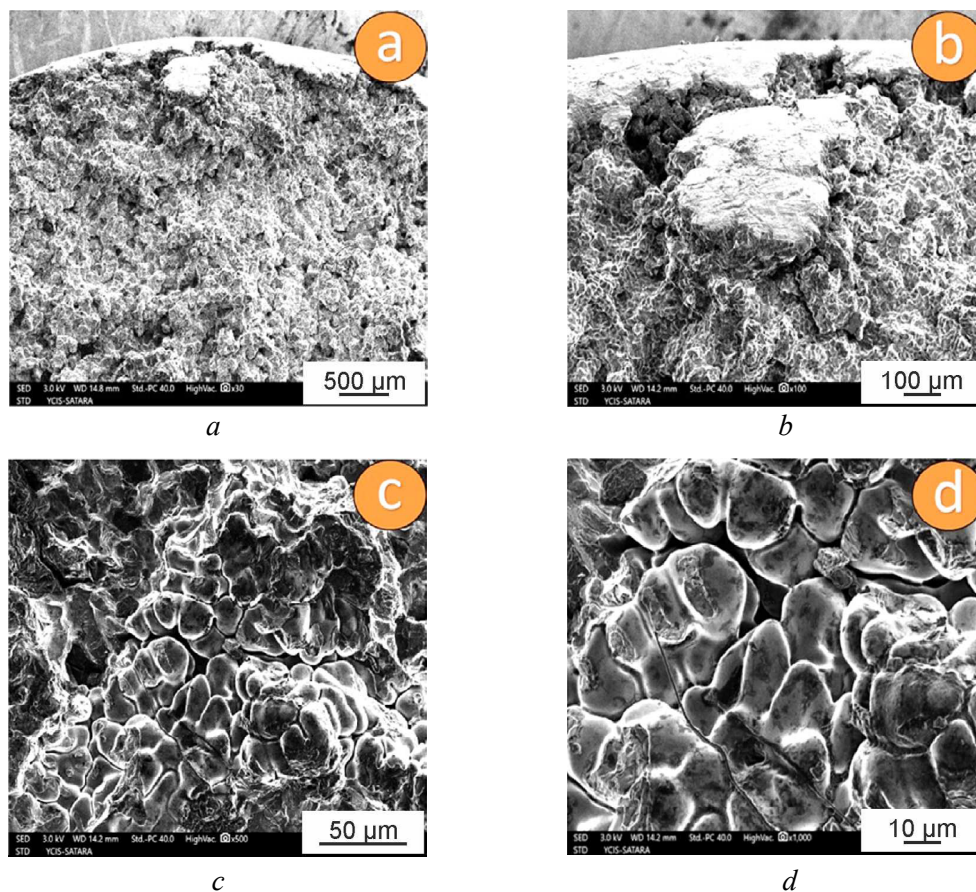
SEM images of fractured surfaces after tensile testing for Specimen 8
